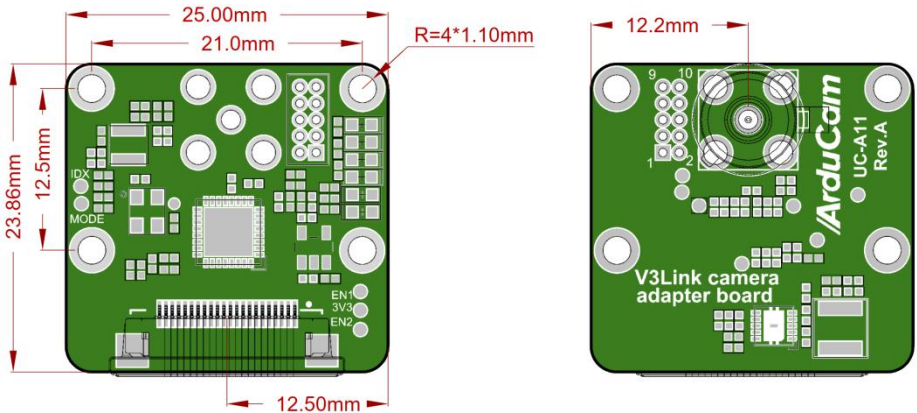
Dimension of Arducam V3Link Camera Adapter Board
